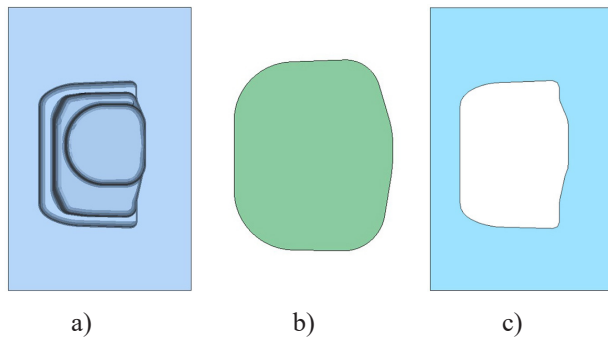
Geometric models: (a) die; (b) workpiece; (c) holder.
